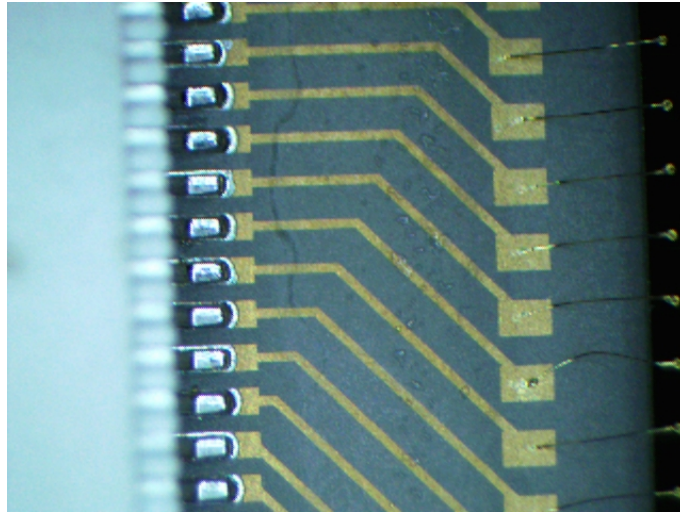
Close-up picture of the metal traces, connector-to-carrier soldering and chip-to-carrier wirebonding.
